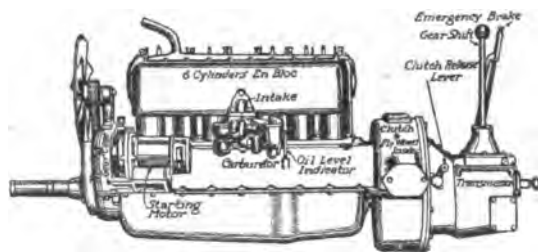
A six cylinder "unit power plant." Transmission, clutch case join the engine. Cylinders are cast together or "in block."
